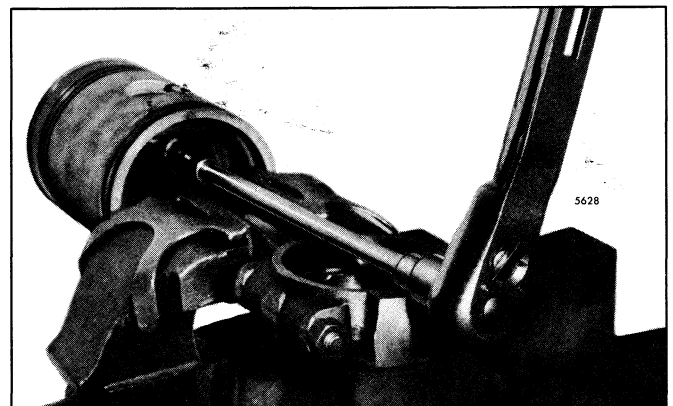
Tightening Connecting Rod to Piston Pin Bolts
